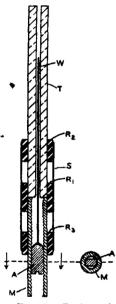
Resistor in longitudinal section. with cross section of threaded parts.
